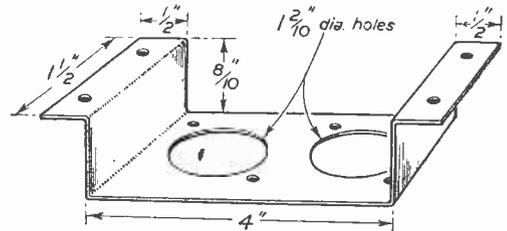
The metal strip for carrying 1C5GT, G valve-holders.
